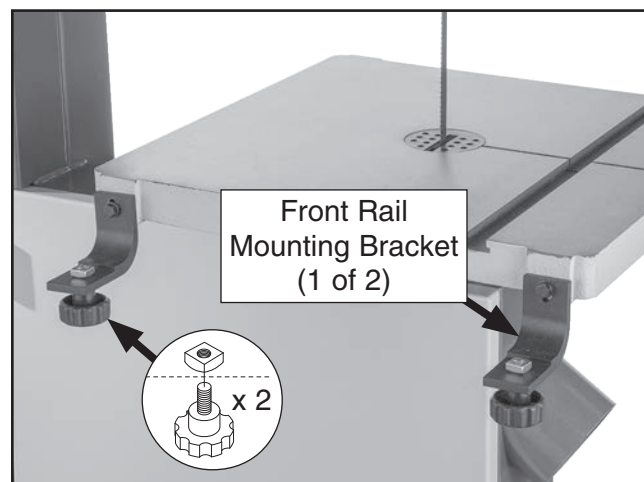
Example of front rail mounting brackets installed on bandsaw table.
